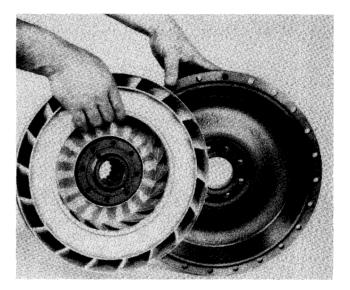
Position turbine and hub assembly in impeller cover assembly.
